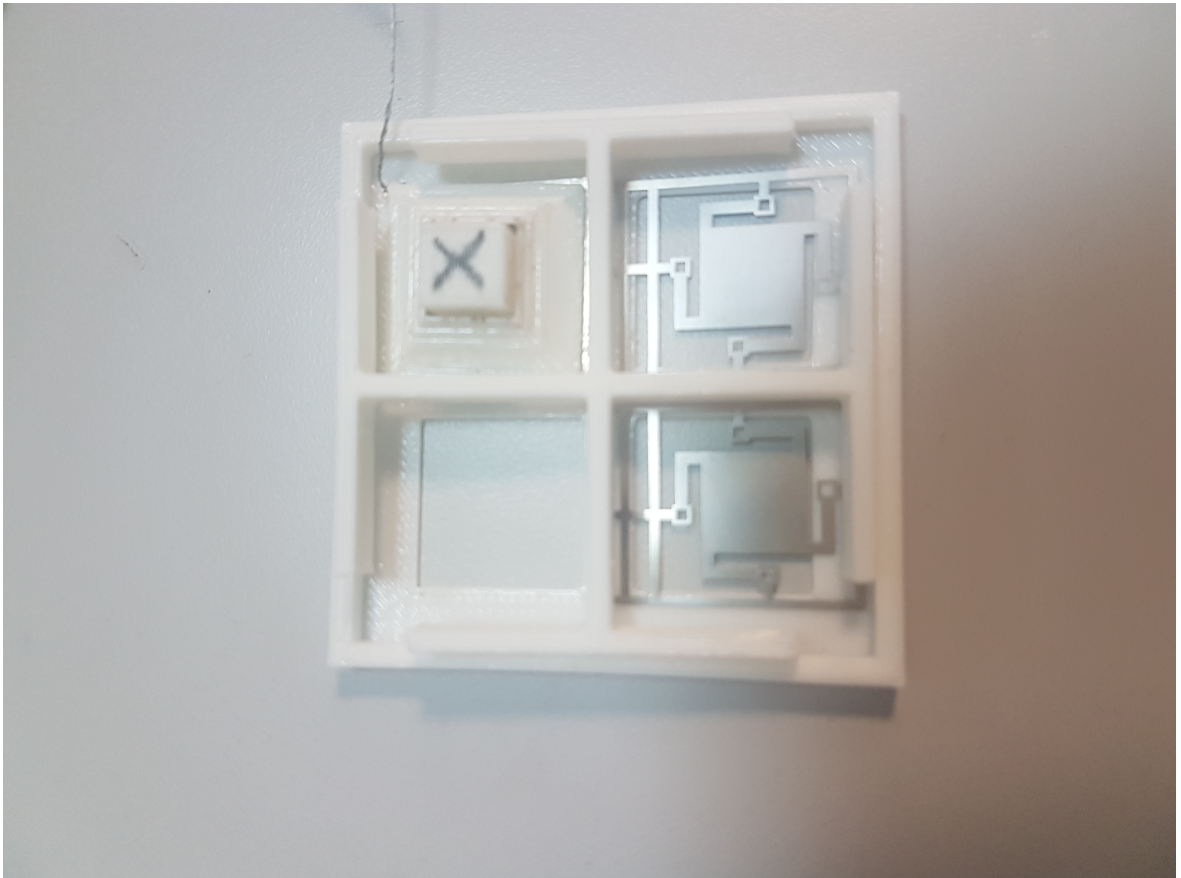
Keyboard button like design and crableg shaped steel electrode.
